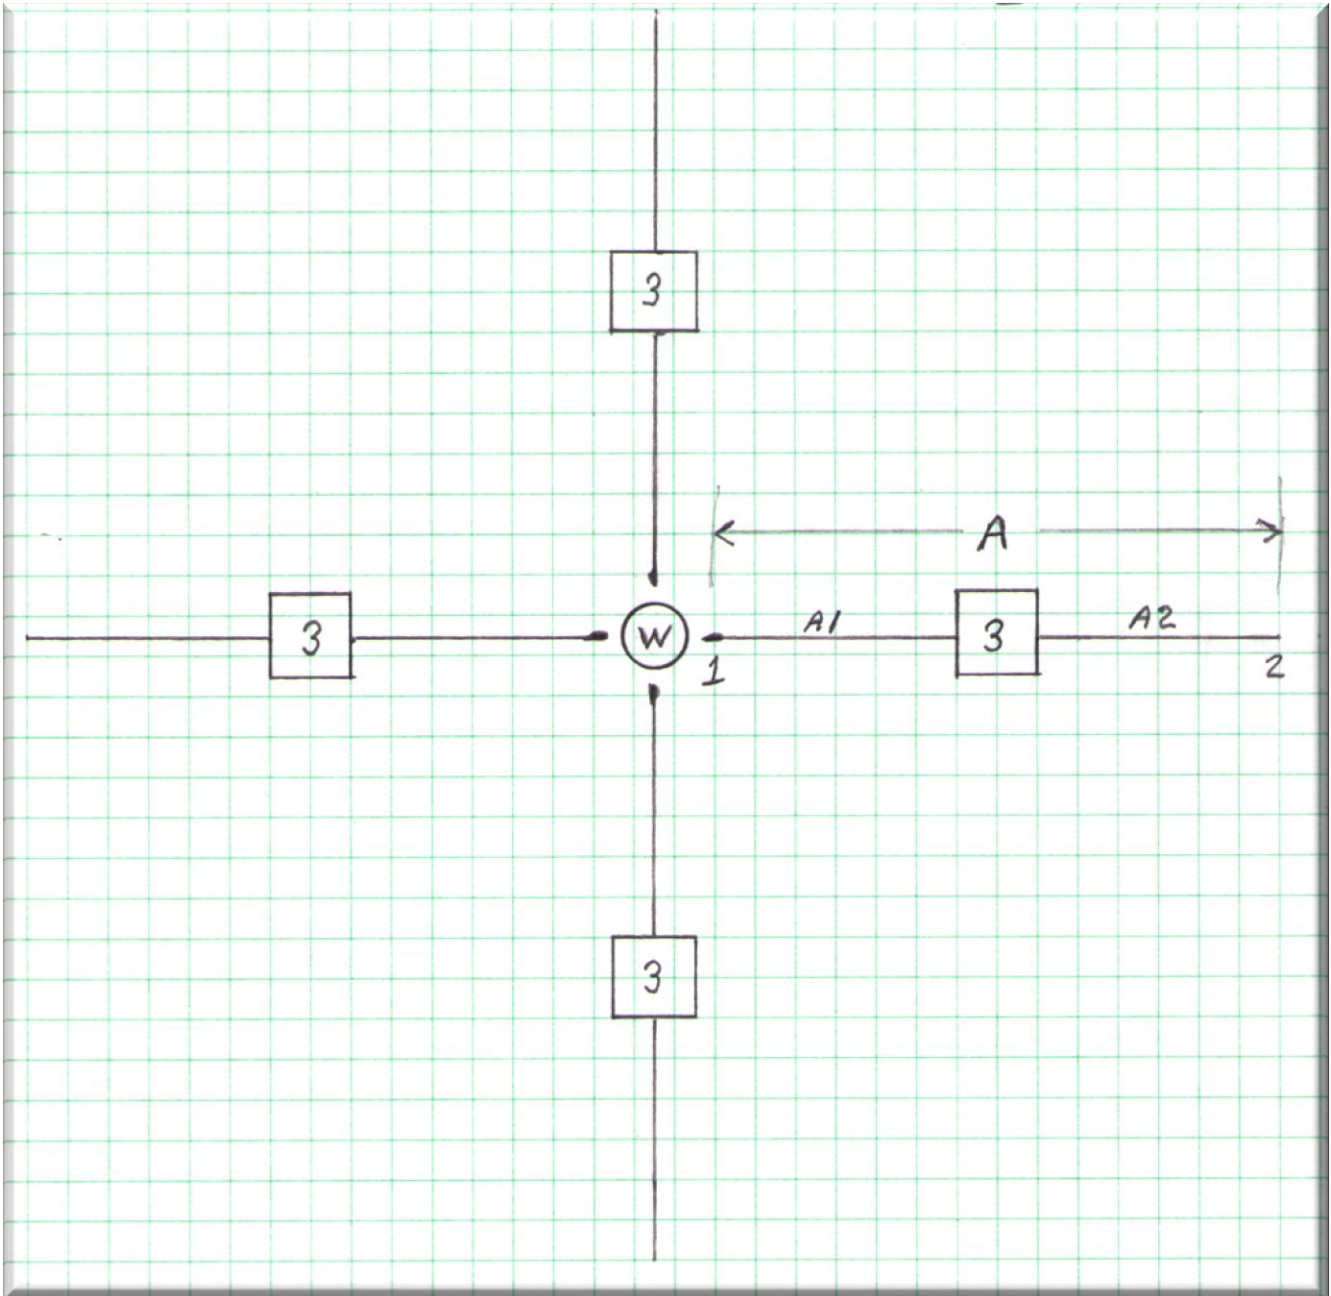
illustrates the final position of the plug at the wellhead, fastened to the SLA. Adjustable clamps are bolted onto the plug arms and again at the SLA, securing the plug and sealing the well by the pressure of the downward force caused by the weight or resistance of the SLA. If the plug is a Type 2, then the inflatable tube (fig 7) is inflated by hydraulic fluid before the plug valves are closed. The plug valves are then closed.
